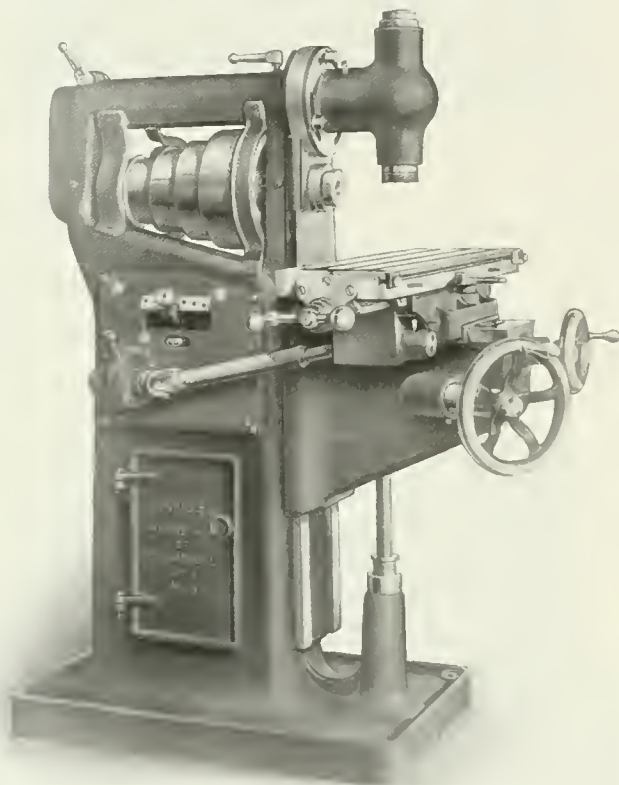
Rockford Milling Machine with Vertical Milling Attachment
